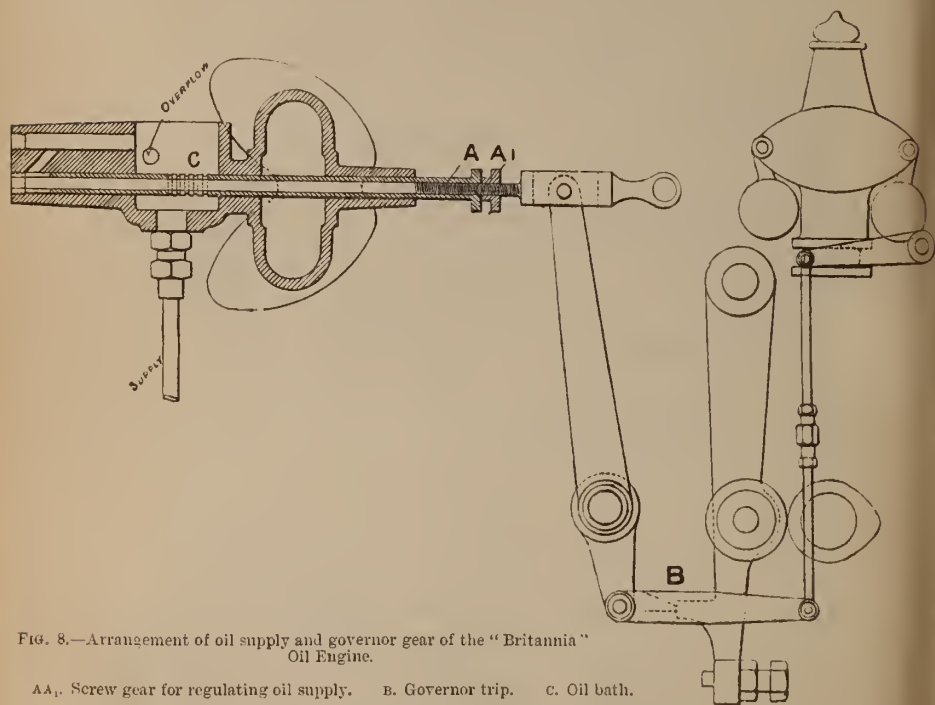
Arrangement of oil supply and governor gear of the "Britannia" Oil Engine.
